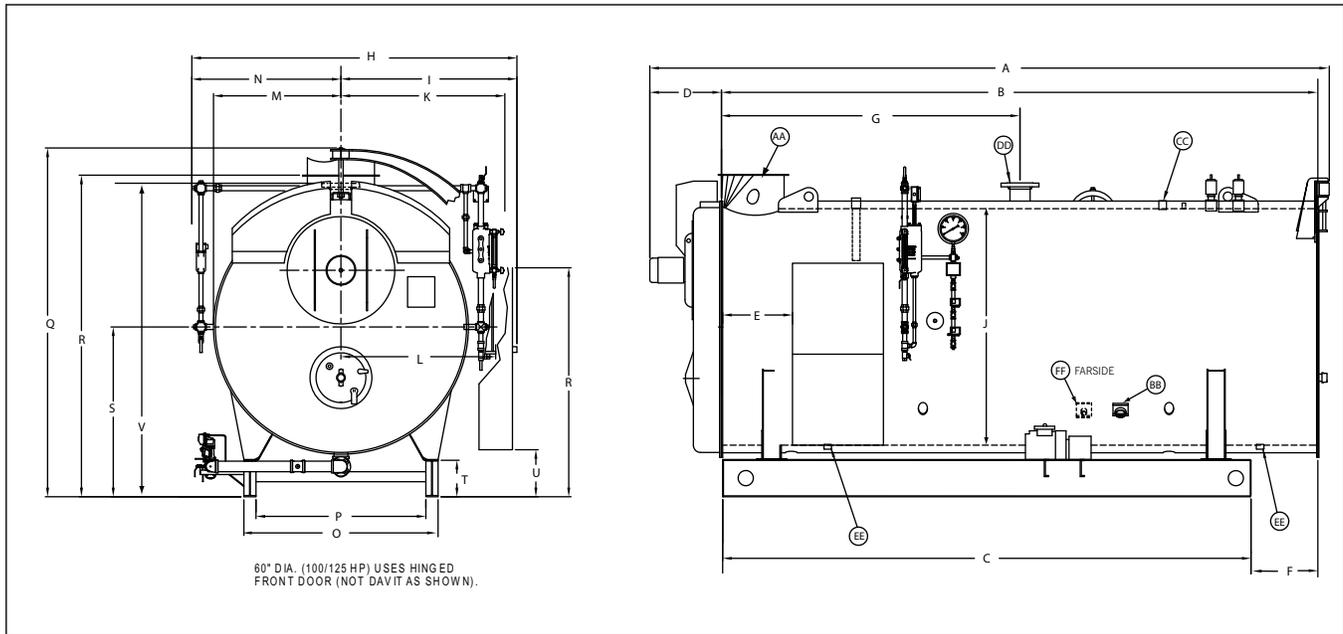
Model 4WI Steam Boiler 100-800 HP
